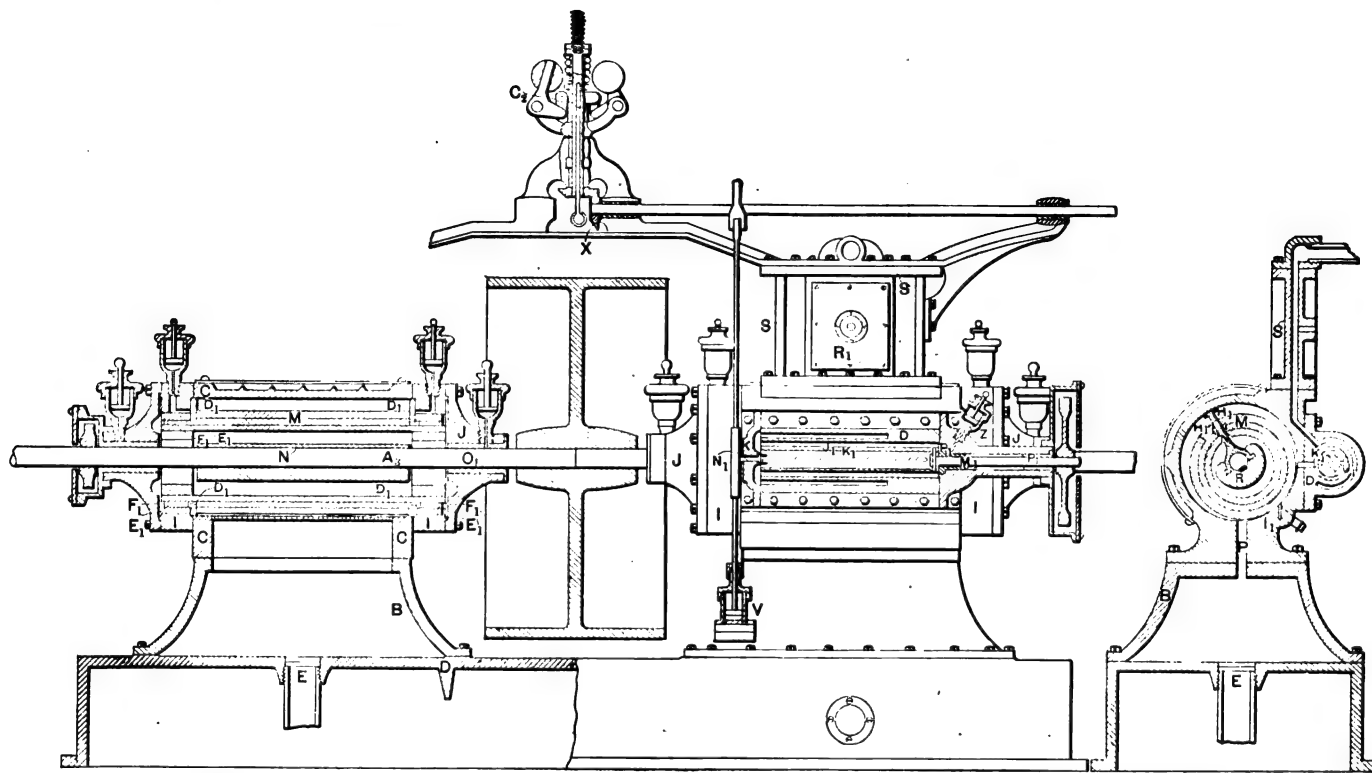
THE FISHER ROTARY STEAM ENGINE.
